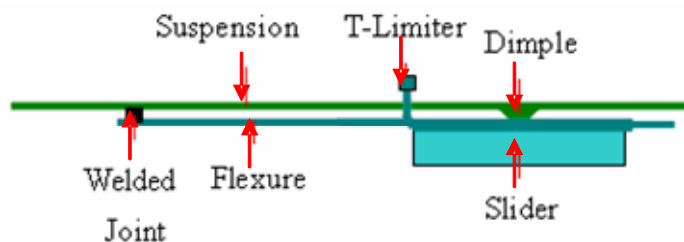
HEAD-GIMBAL ASSEMBLY DEVICE II
